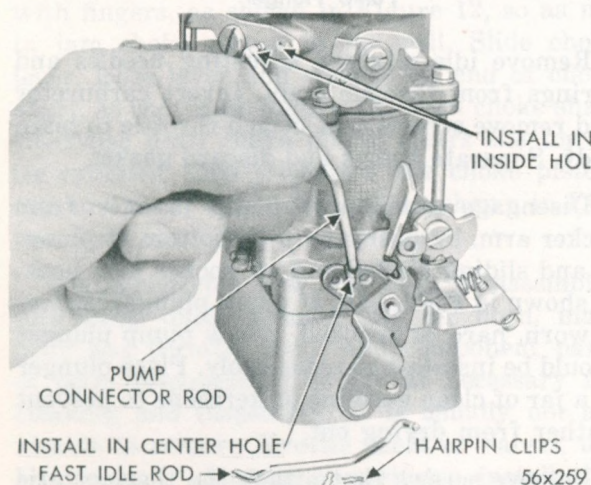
Removing or Installing Fast Idle and Pump Connector
